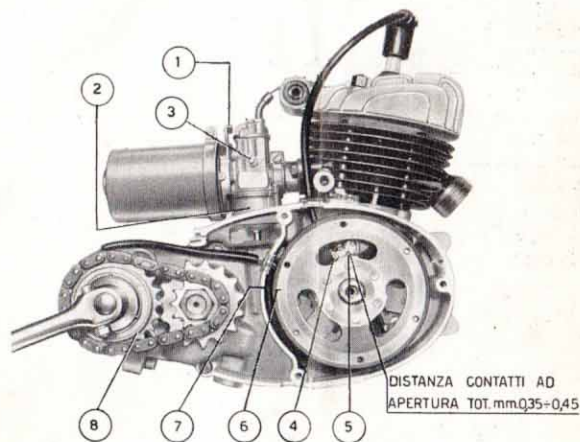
ENGINE, SIDE VIEW SHOWING FLYWHEEL MAGNETO
